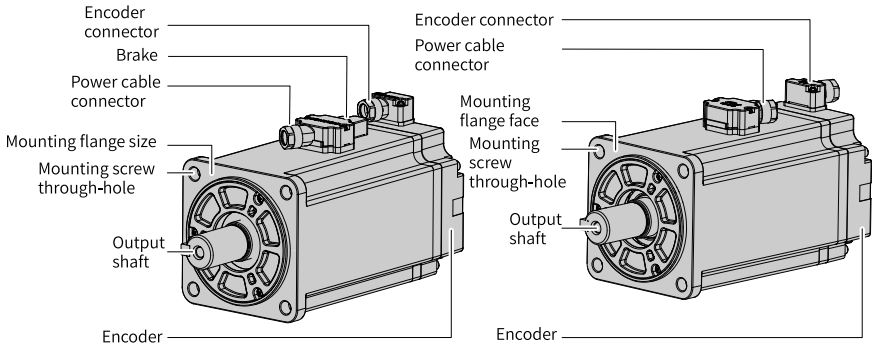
Components of a terminal-type servo motor (Left: motor with front cable outlet; Right: motor with rear cable outlet)
